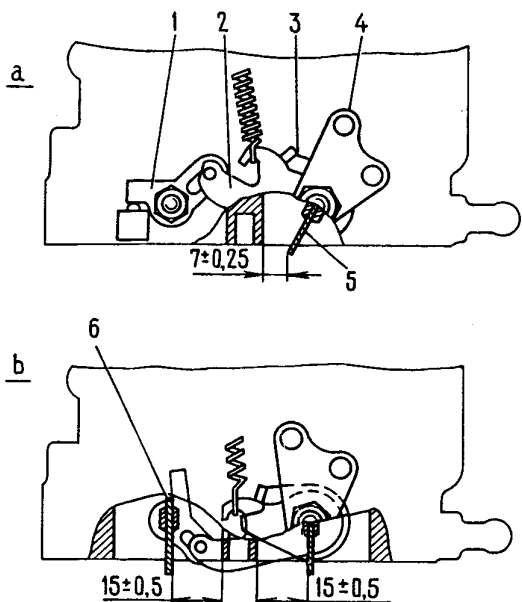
Adjusting Full and Partial Opening of Throttle Valves in Carburettor 2106-1107010:
